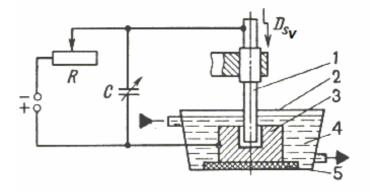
Electrical discharge machining: 1 – tool (cathode); 2 – pool; 3 – work-piece (anode); 4 – dielectric fluid (kerosene); 5 – insulator
